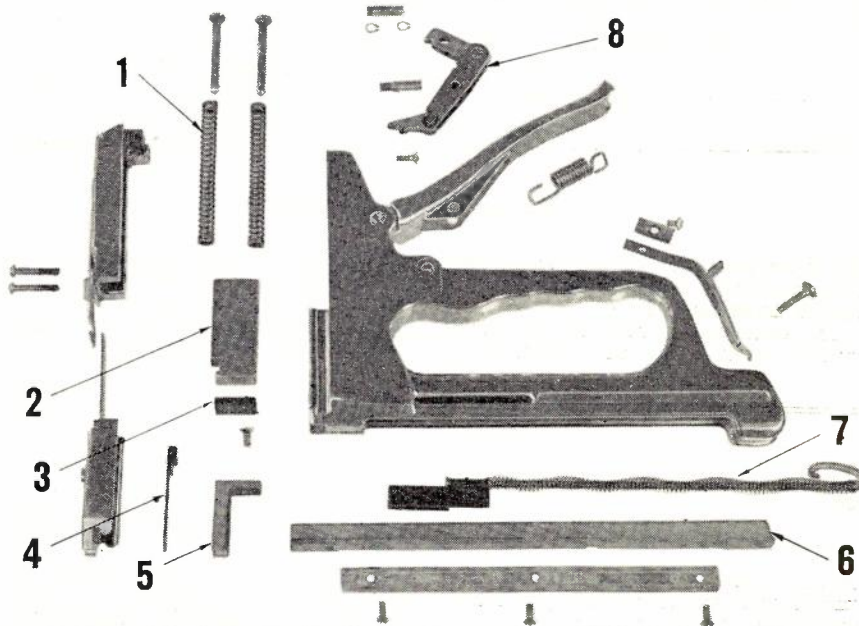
Dismantled Stapling Machine Showing Component Parts. (1) Main Spring, (2) Hammer, (3) Rubber Stop, (4) Striker, (5) Striker Guide, (6) Staple Guide, (7) Magazine Spring, (8) Trigger Assembly.
